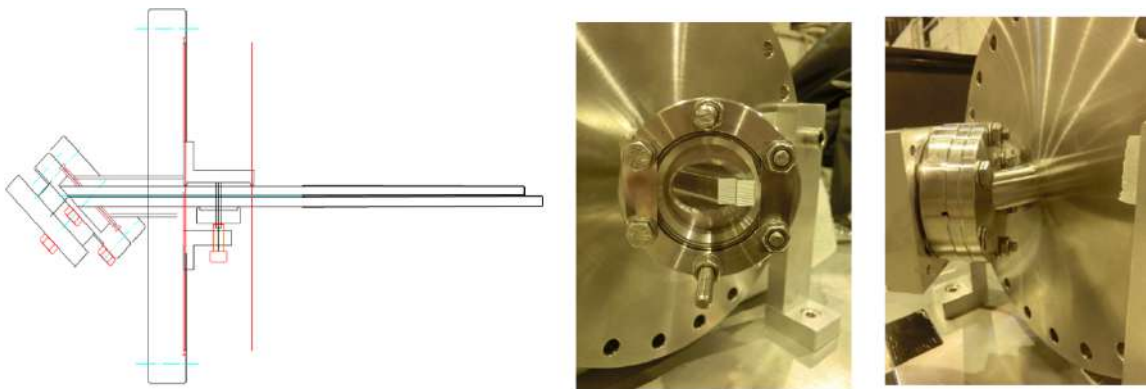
Left: drawing of the CpFM assembly: the bars are attached to the flange connected to an inclined viewport. Right: picture of the inclined viewport.
